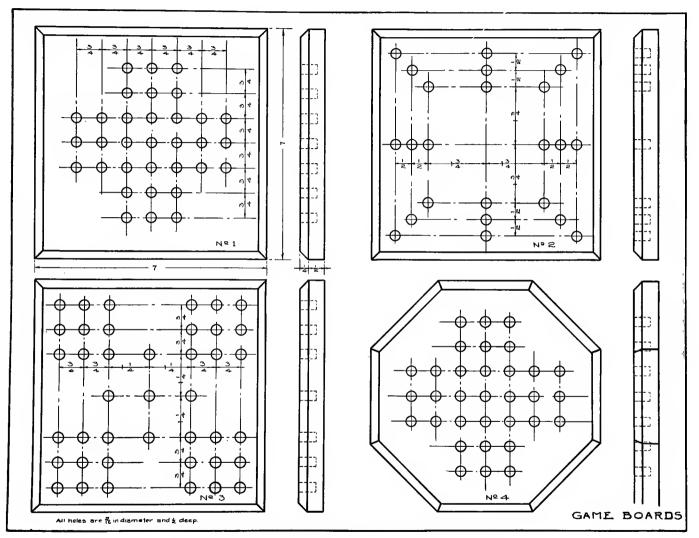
Working Drawing of Game Boards (Sixth Grade)
